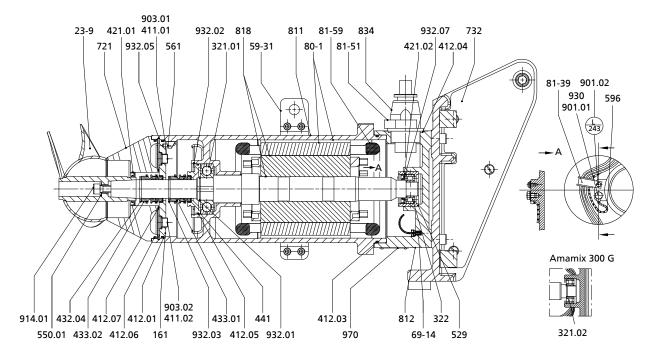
General assembly drawing of Amamix 300/400/600, motor housing material stainless steel
